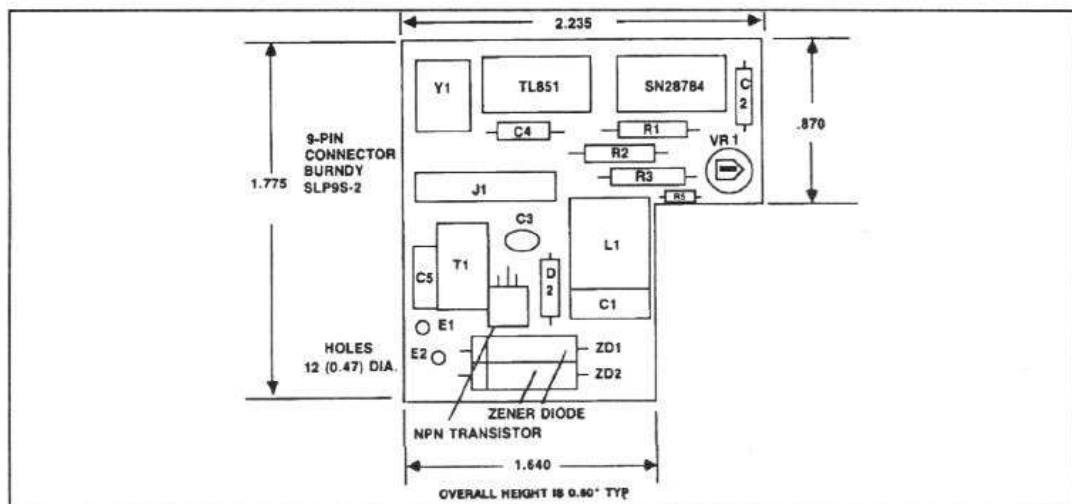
COMPONENT LAYOUT AND DIMENSIONS OF MODULE
